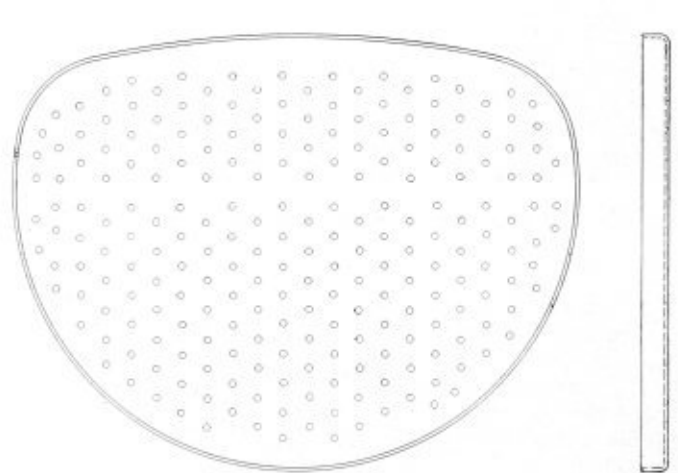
Firebox tube sheet for a combustion chamber boiler. Tube lead holes are shown
